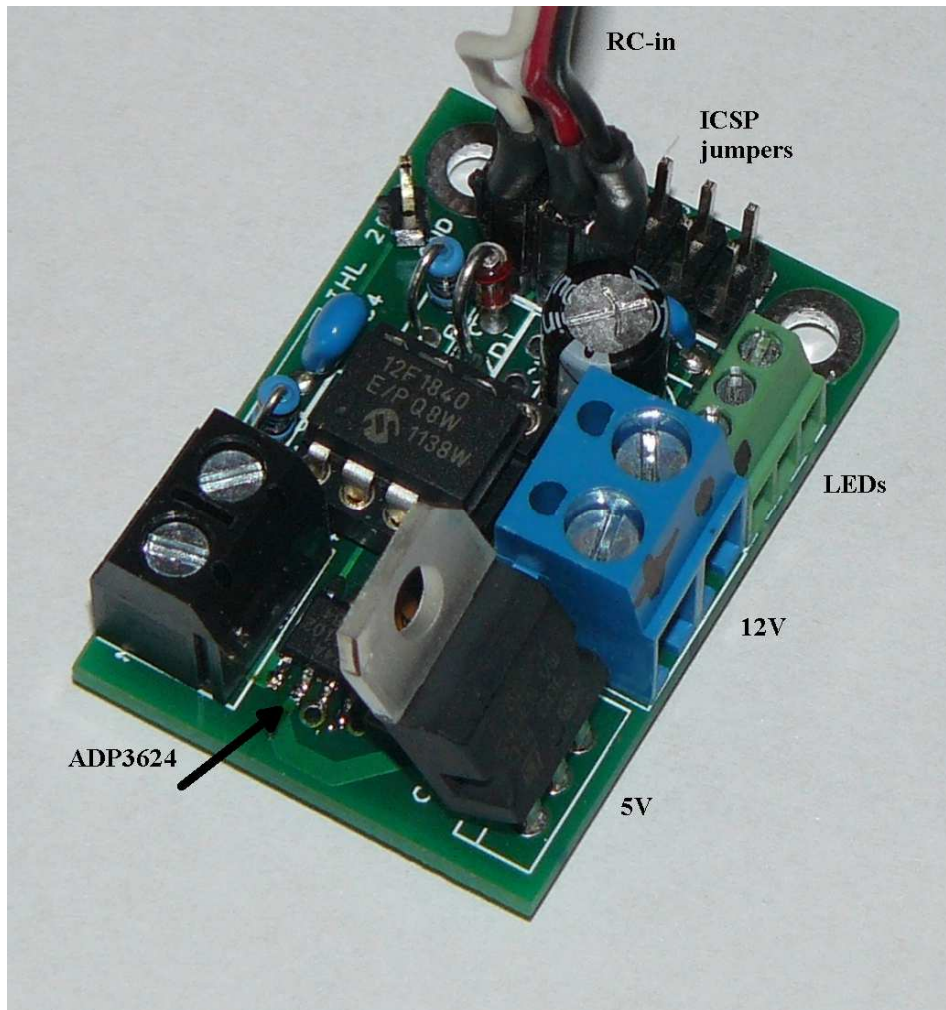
C. PCB with ADP3624 bridge driver. Board size is dimensions are 26.5x 38.2 mm.
